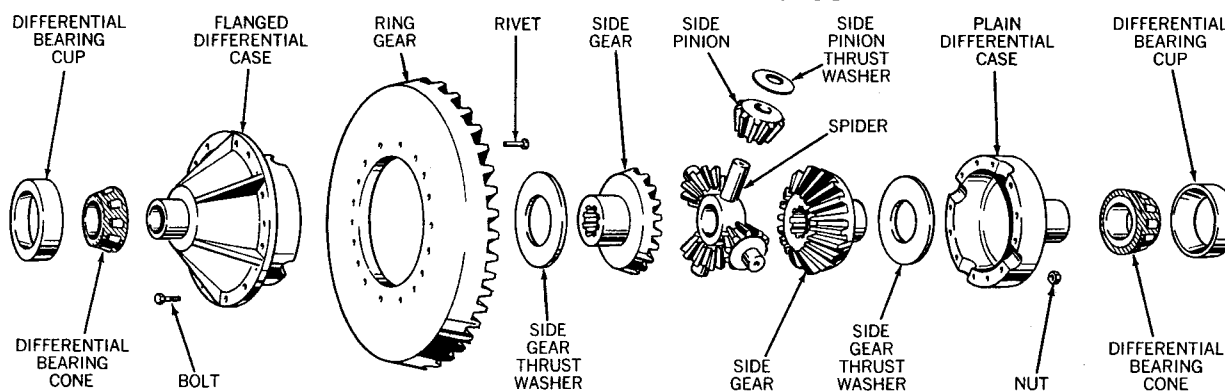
Exploded View of Axle Differential (Model 22M and 28M Axles)
